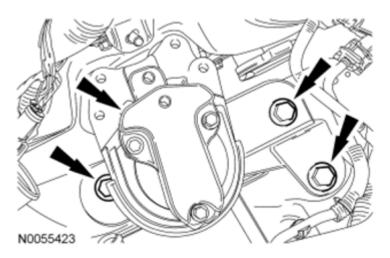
Locating Engine Mount Bolts Courtesy of FORD MOTOR CO.
